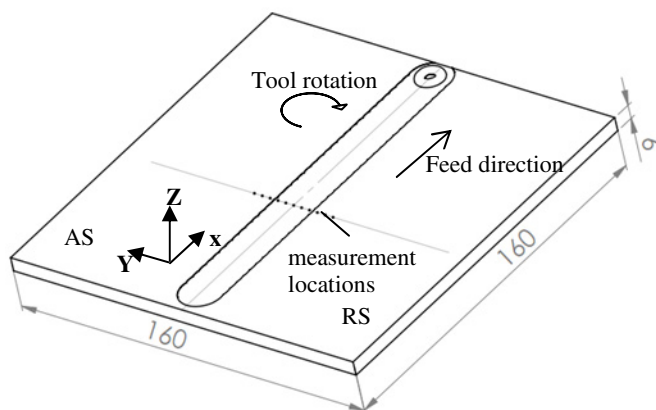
Schematic of the weld dimensions and residual stress measurement locations
